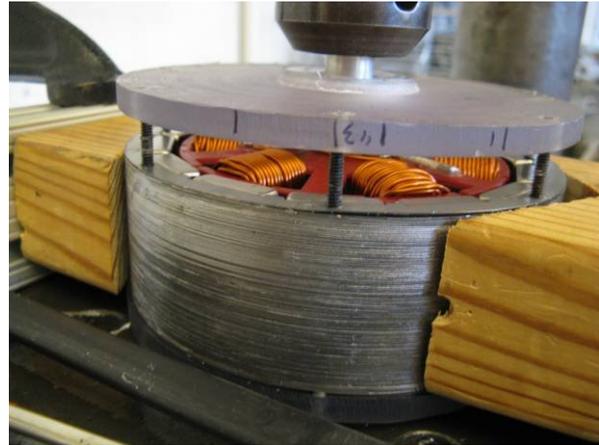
The stator and second side plate are dropped into the rotor with the aid of a drill press.
